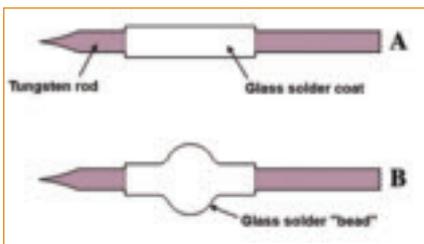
Sketches of the tungsten rod showing: A — Position of the glass solder coat; B — appearance of the glass solder bead.
